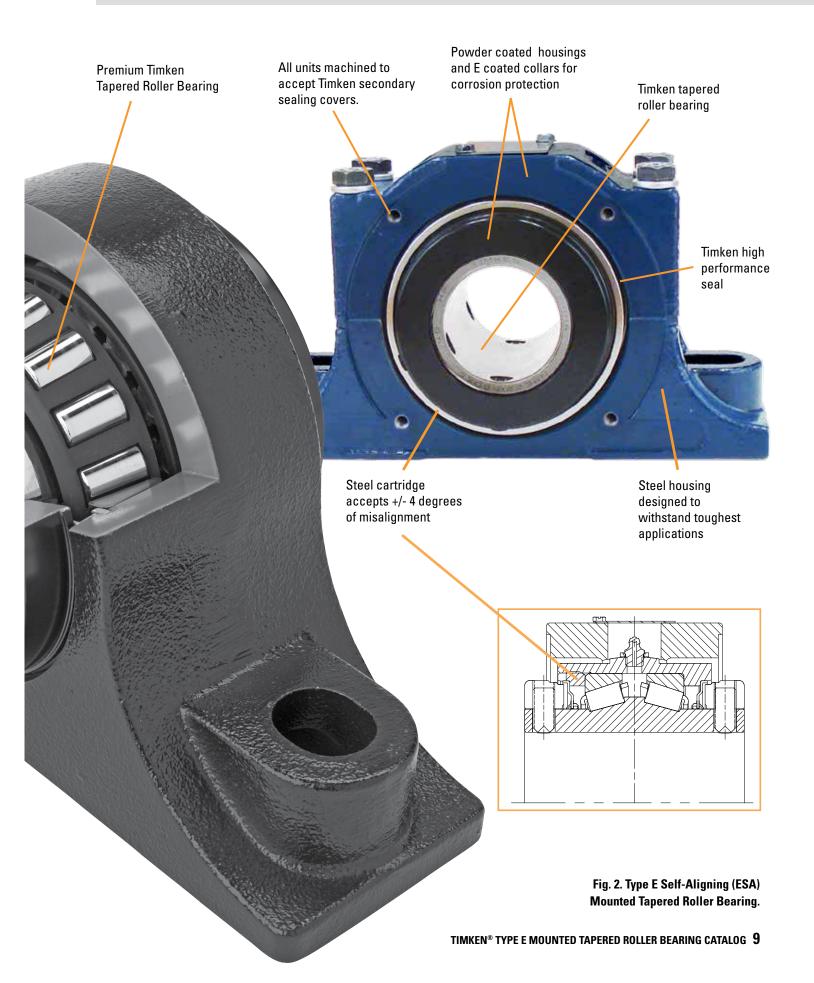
Type E self-aligning mounted tapered roller bearings.
